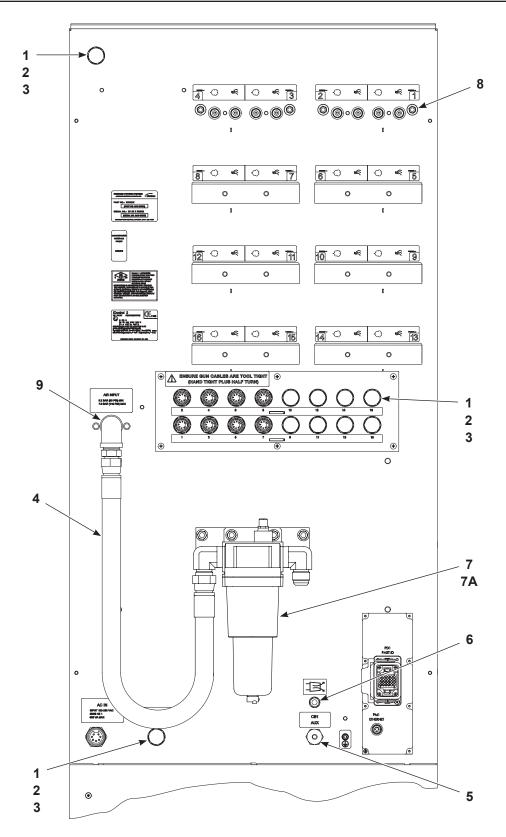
Main and Auxiliary Console Parts – Rear View(1 of 3)
